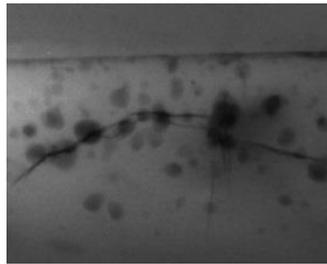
Pores, incomplete welding and hot cracks on the X-ray radiogram
